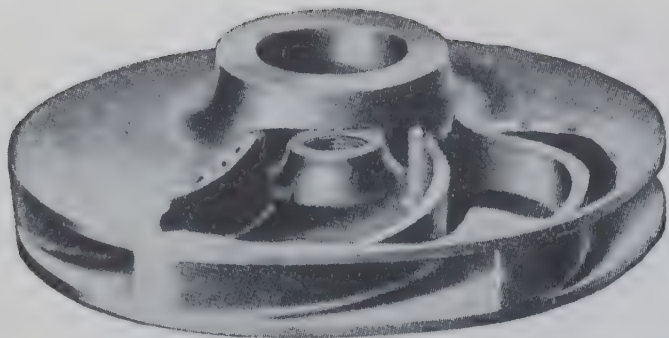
Cutaway view of high-head close-clearance impeller. (Nagle Pumps.)
